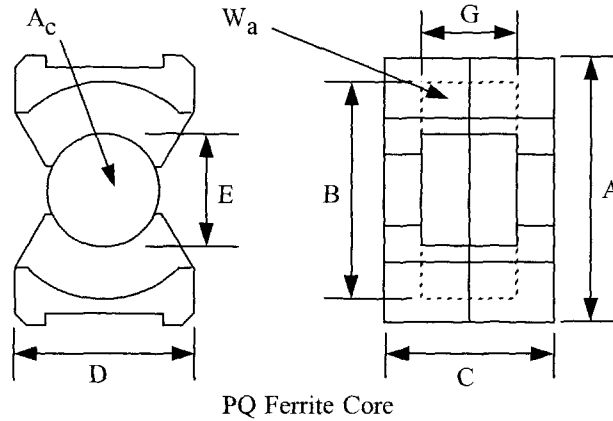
Dimensional Outline of a PQ Ferrite Core.
